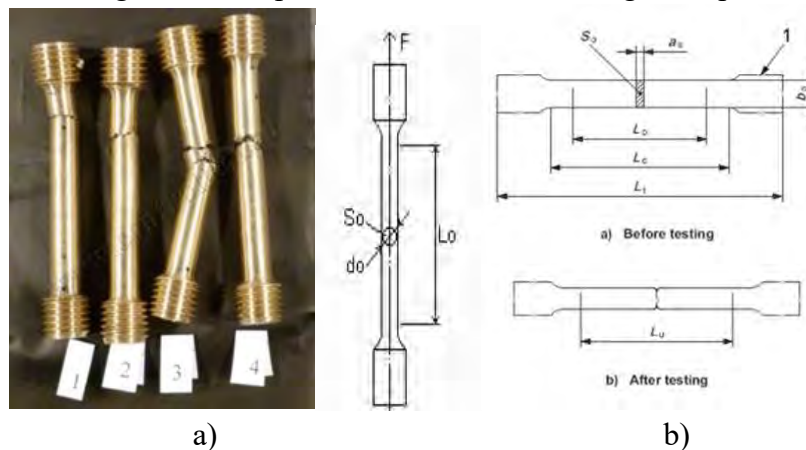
Tensile strength specimens: (a) tube; (b) a flat body with a rectangular cross-section
